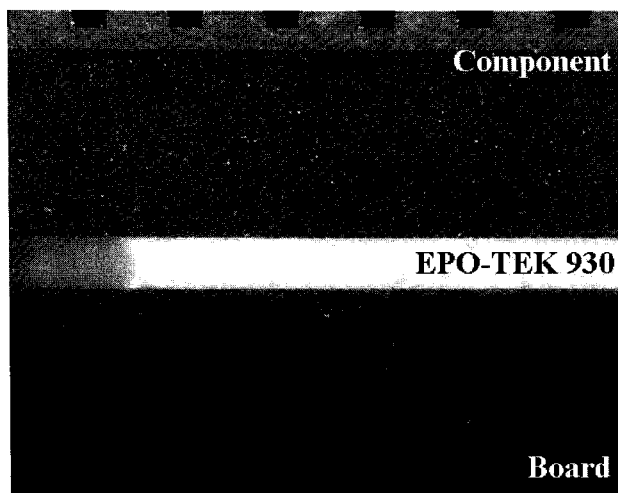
Microsection showing EPO-TEK fillet close to a corner of the component
